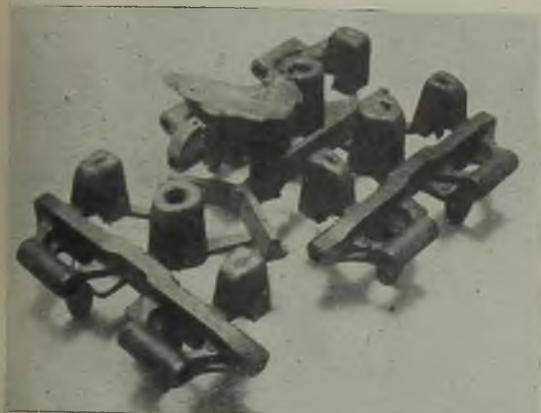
A FOURTH EXAMPLE OF TRACK CASTING.
